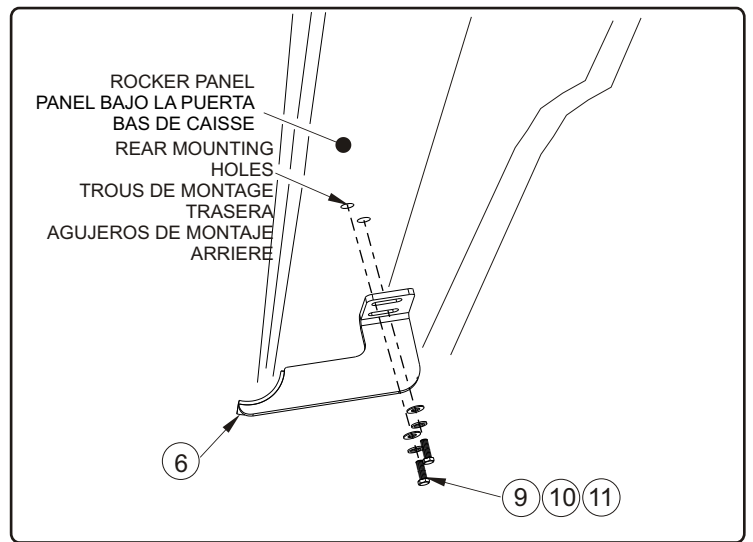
REAR, DRIVER SIDE SHOWN
